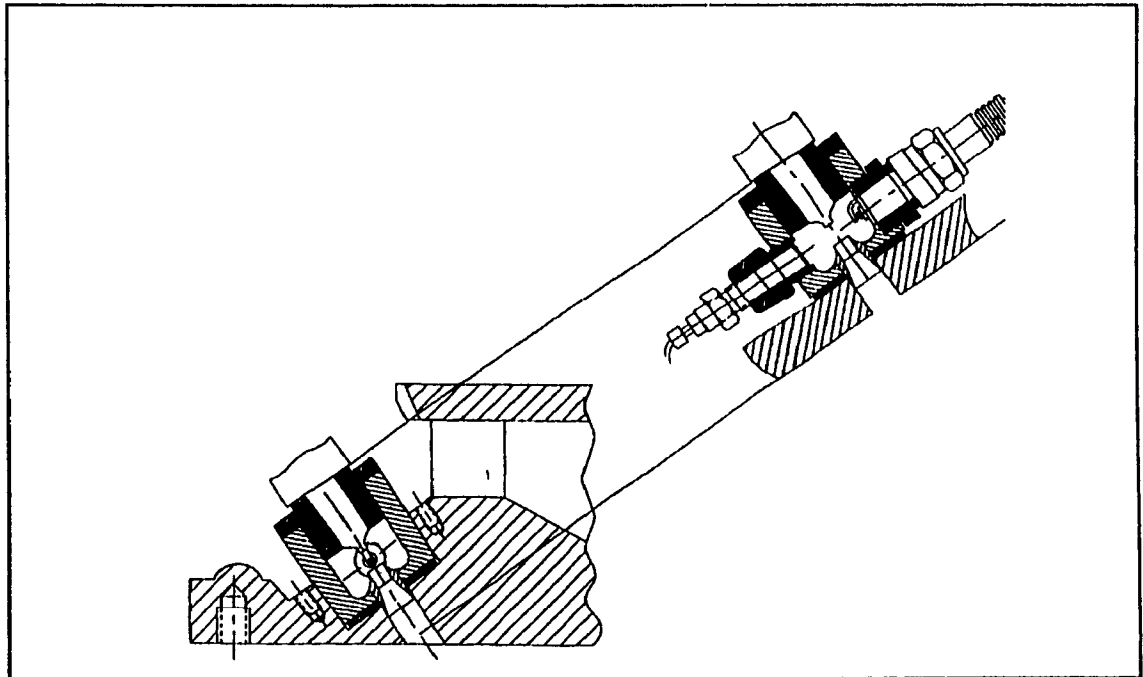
Ignition chamber concept for the open combustion chamber of the Petters engine
